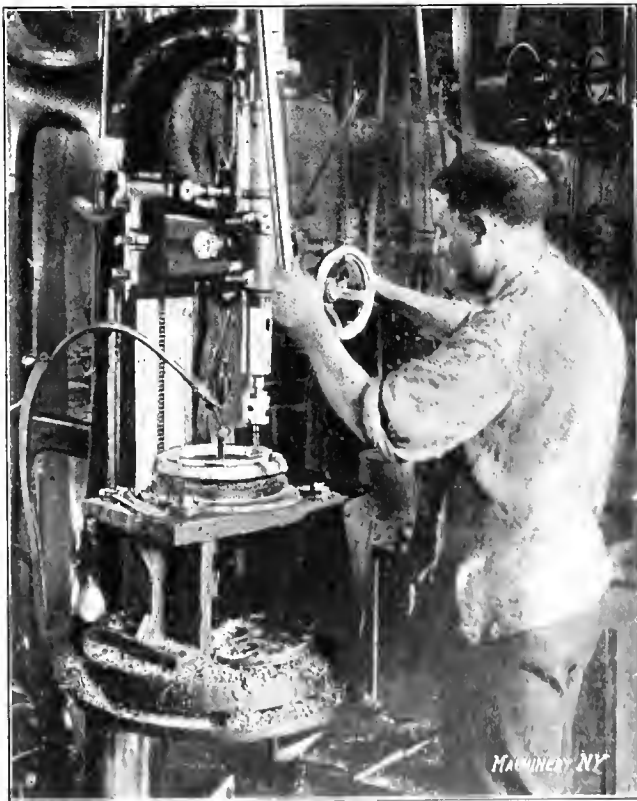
A Tapping Operation and Operator with a Remarkable Record, 75,000 Blind 5/16 Inch Holes in Chrome-nickel Steel without breaking a Tap
